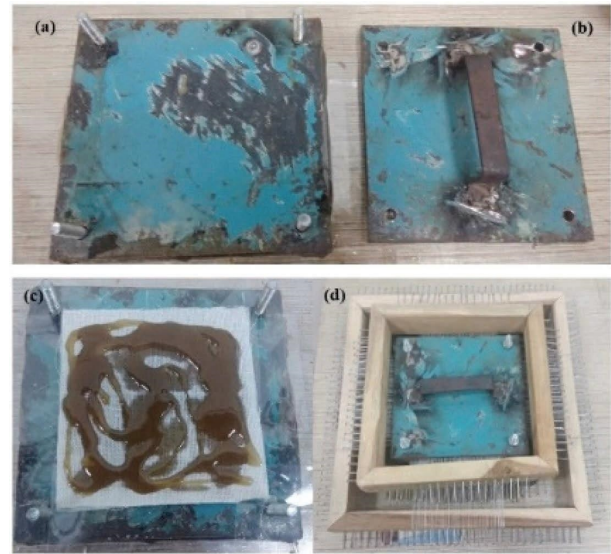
The fabricated set up for the hand lay-up technique used. (a) Lower plate; (b) upper plate; (c) lower plate with matrix material; and (d) arrangement for placement of bi-axial fibres.
